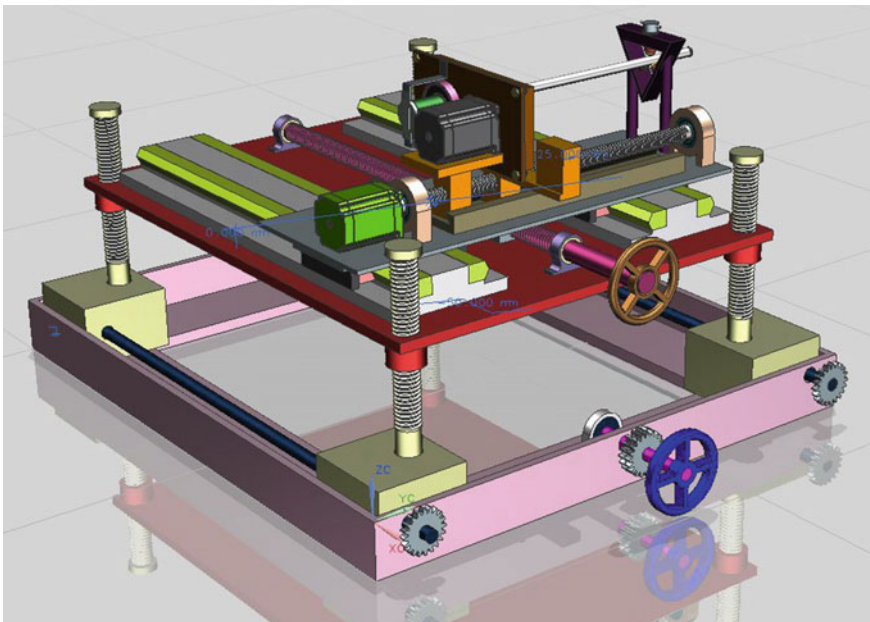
Entire assembly of IBW torch capable to do welding at any location of dish end
